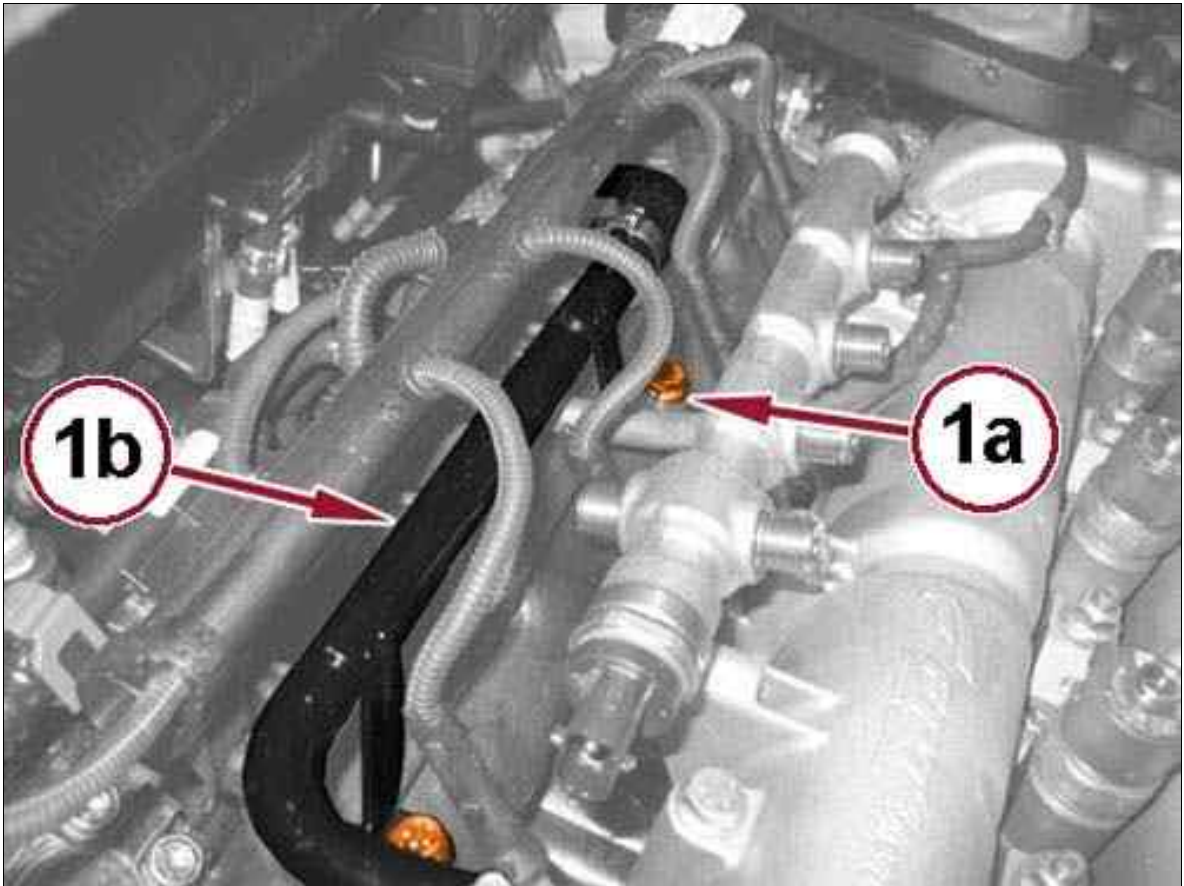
Oil Vapor Delivery Pipe, Quick Coupling & Screw
